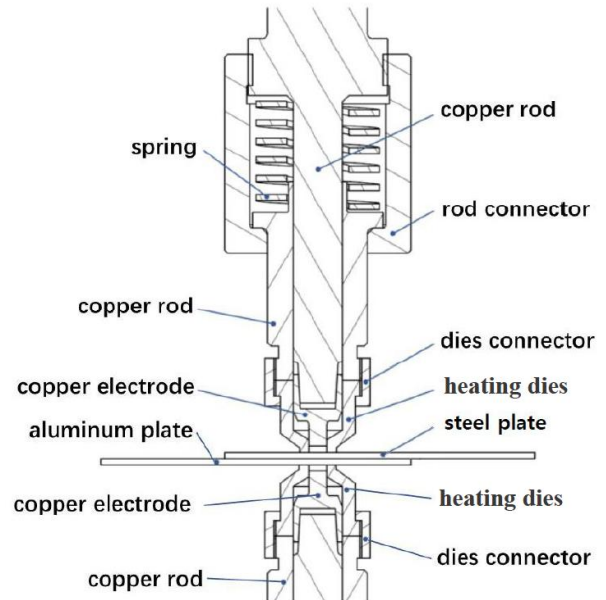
Section view double spot welding machine using heating dies and copper electrode [9]
